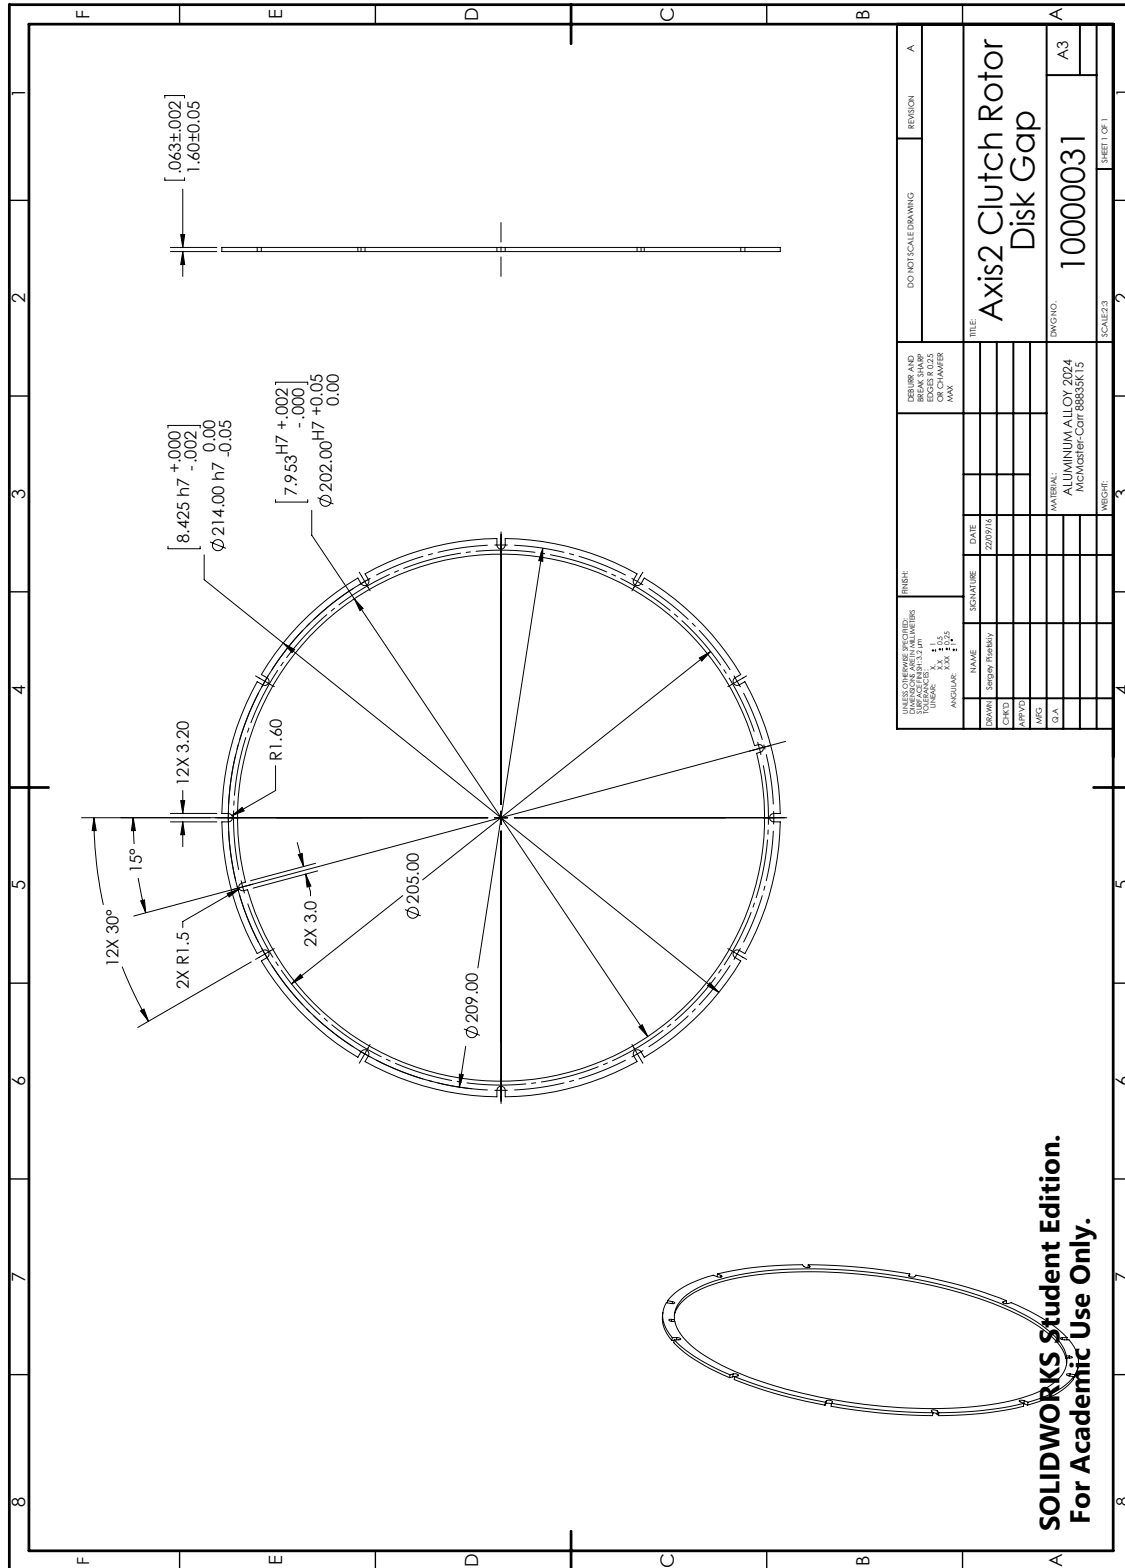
Drawing: Joint 2 clutch rotor spacer.
